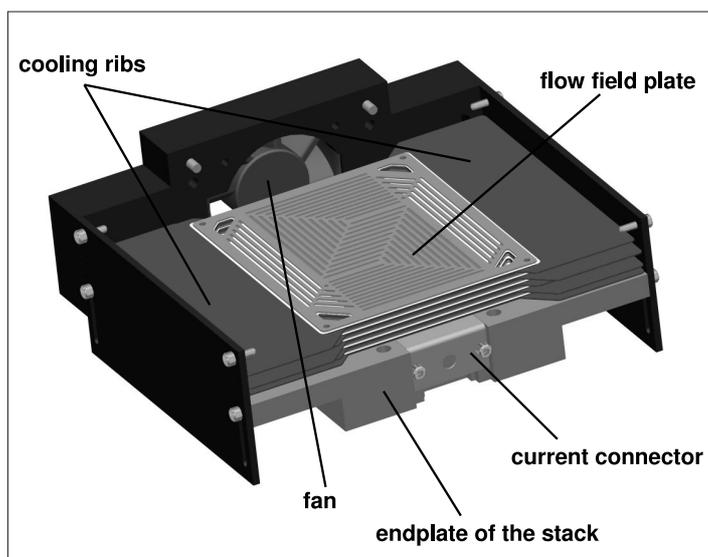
CAD model of inside view into a 5-cell stack including cooling fan and housing
